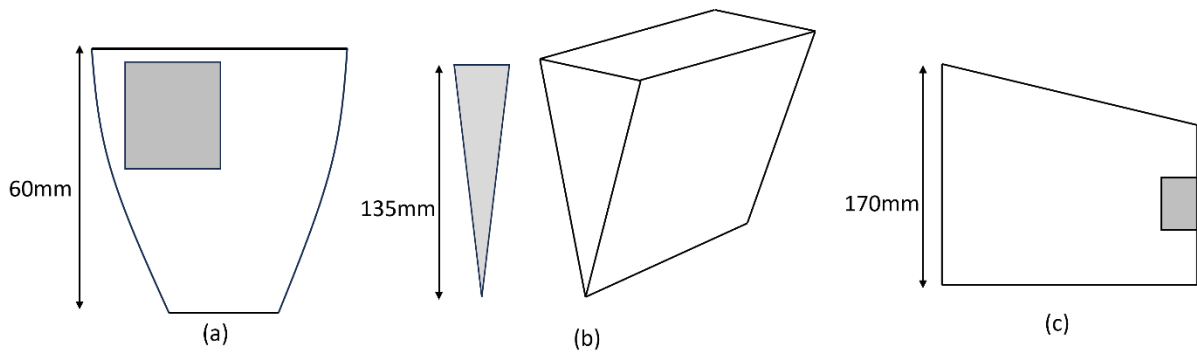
Illustration of castings produced through (a) controlled cooling (b) wedge mould casting (c) book mould casting. Grey area shows the location from where the samples were extracted for metallographic observations.
